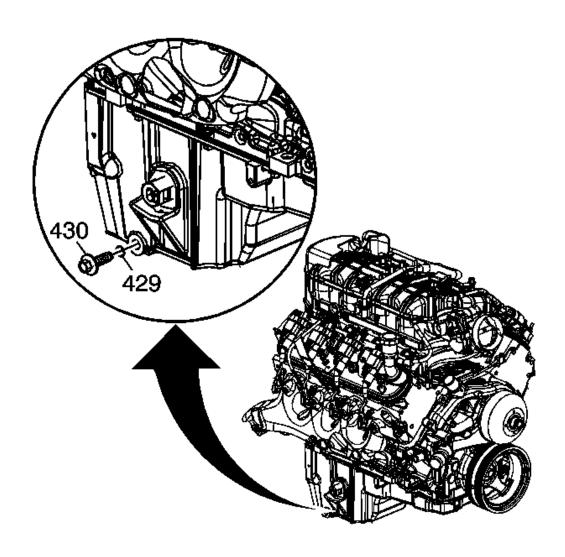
View Of Oil Pan Drain Plug & Seal Courtesy of GENERAL MOTORS CORP.
